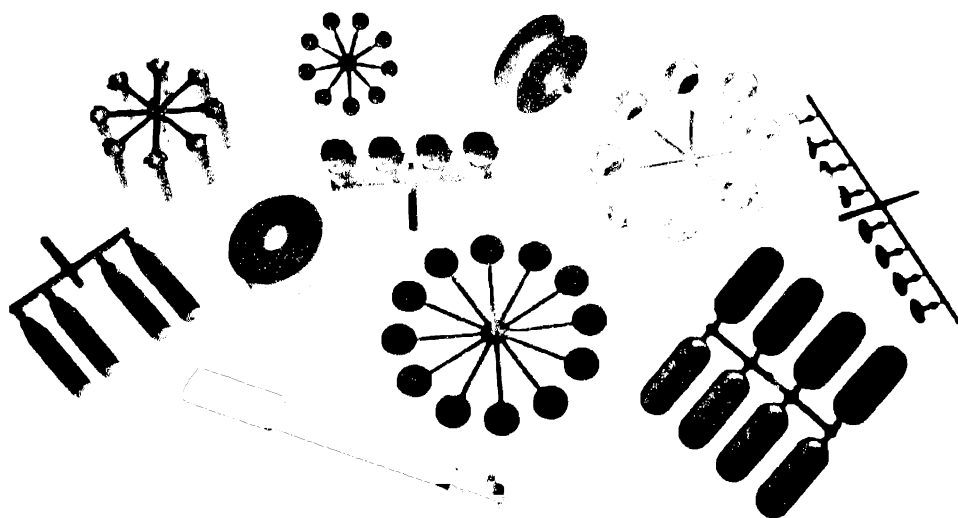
Multiple-impression injection mouldings. (Dowding & Doll, Ltd.)
